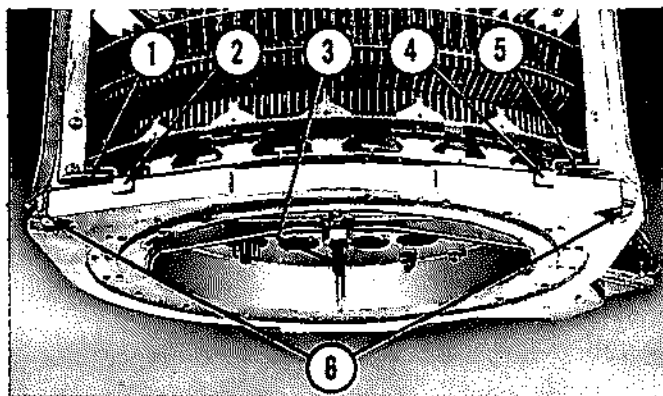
ELECTRIC SELECTOR CENTERING - 2600
